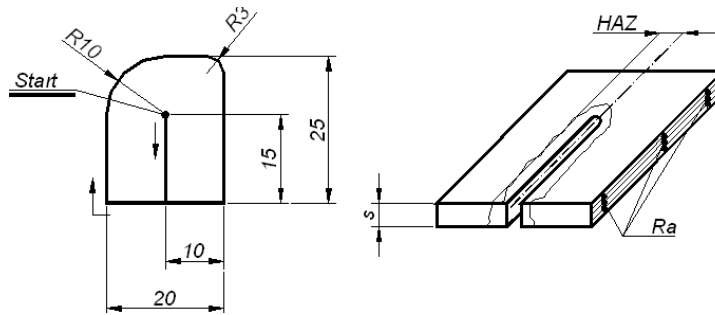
Geometric shape patterns for cutting and schematic view of work piece parameters during laser cutting.
